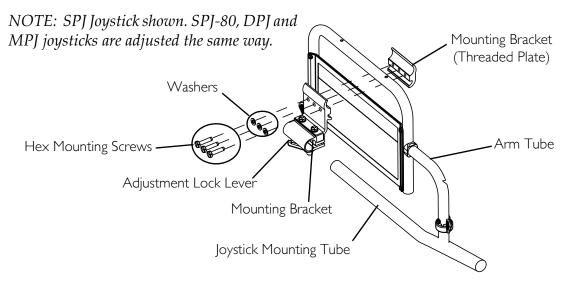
Removing/Installing the Joystick - ASBA and Adjustable ASBA Models
